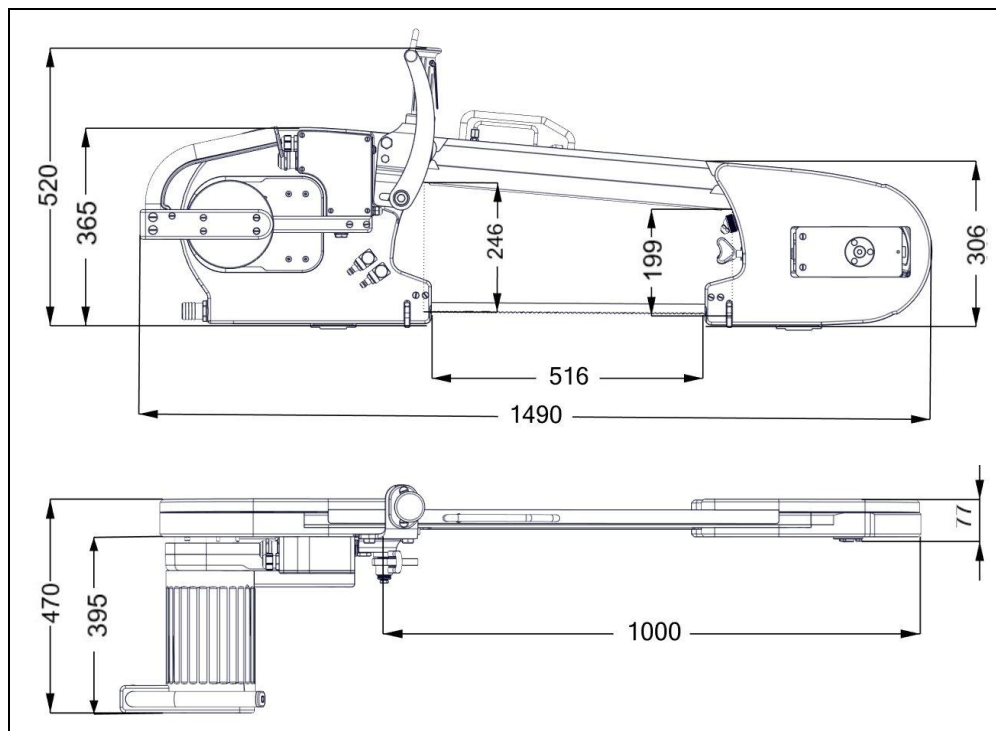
Dimensions WBS51-08 (specifications in mm)
